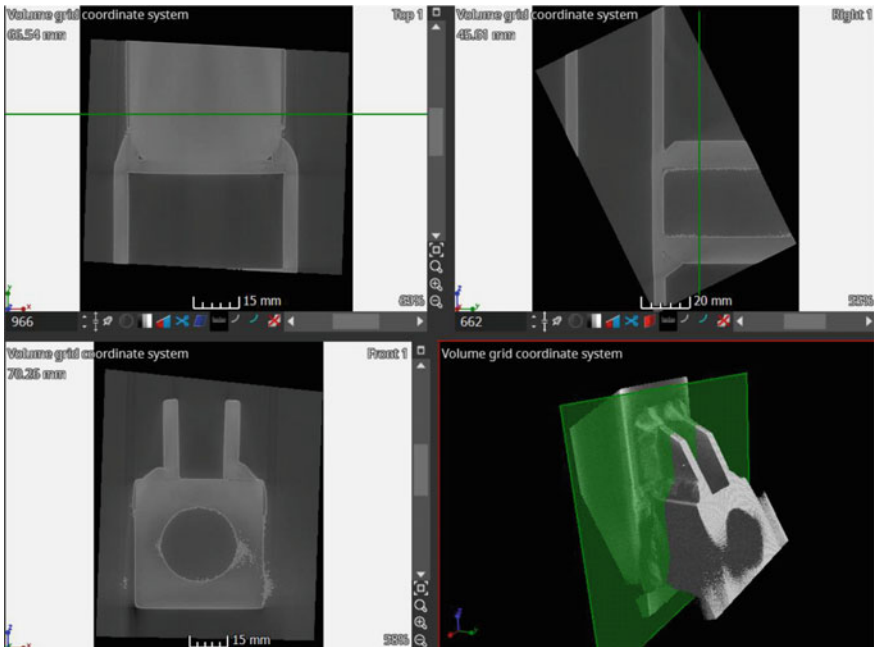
Swingarm X-ray weld analysis
